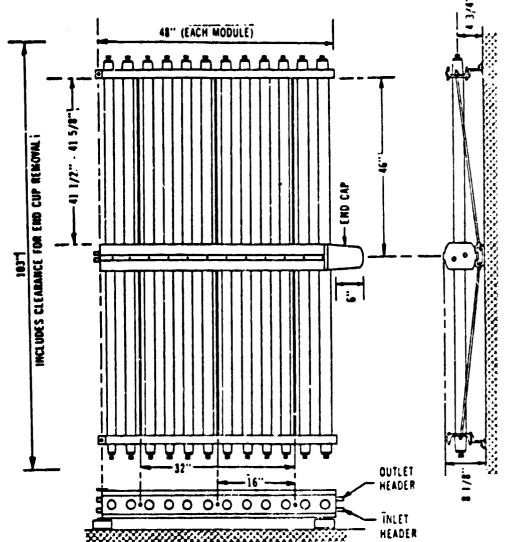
Drawing of SUNPAKTM Solar Collector Module.
